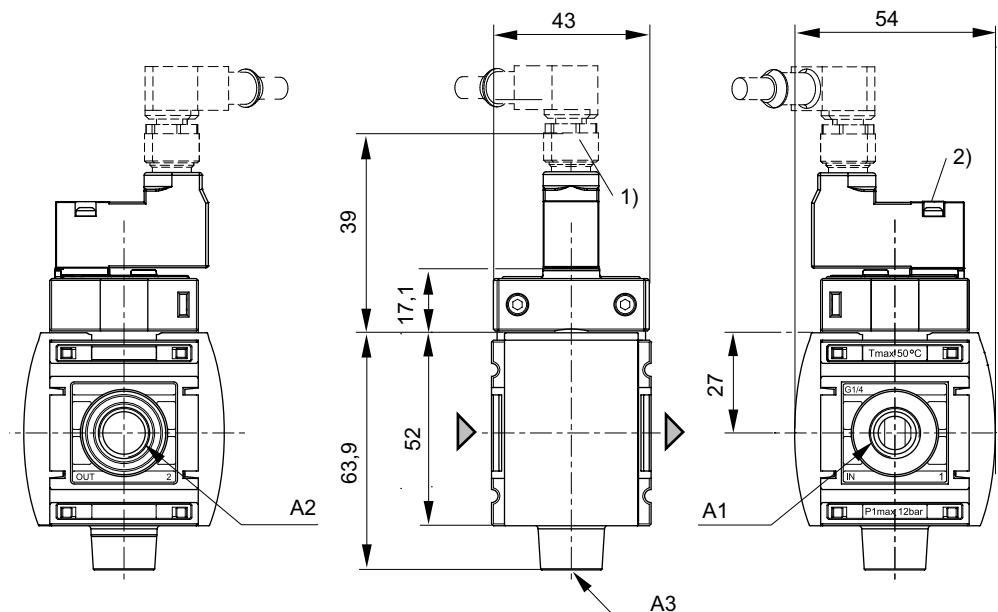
3/2-directional valve with pilot valve and port for electrical connector form C
